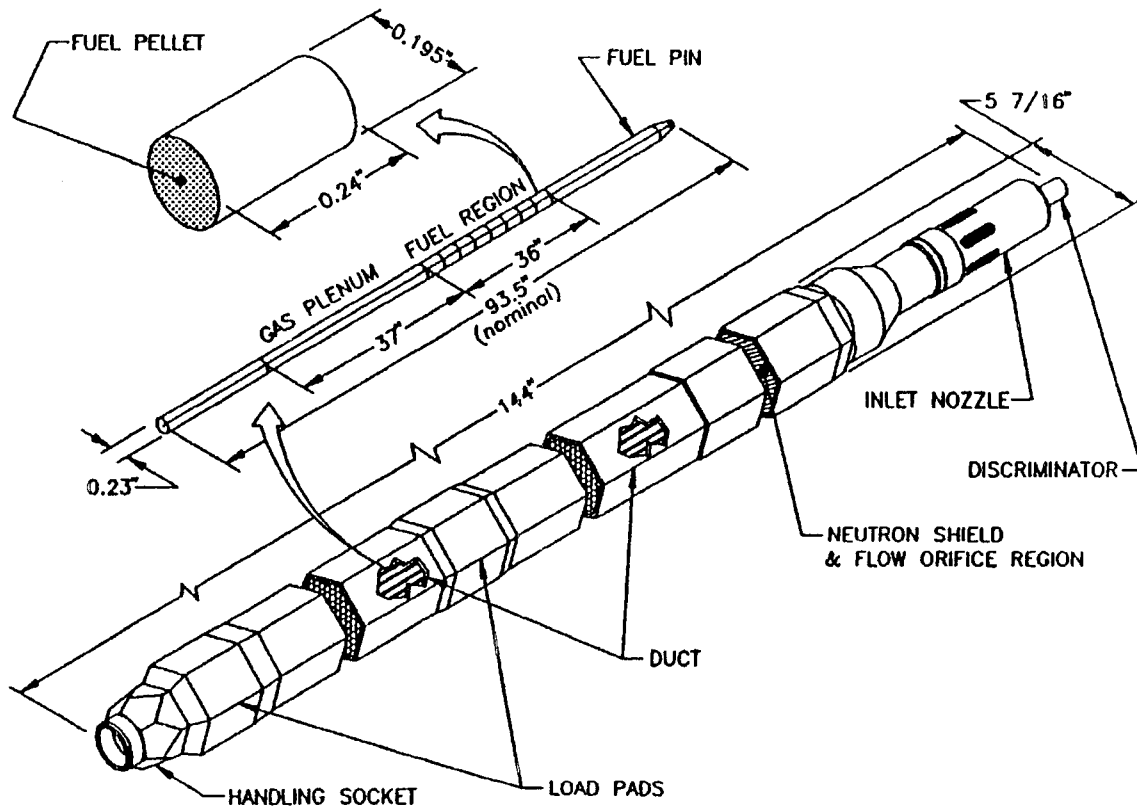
Fast Flux Test Facility standard driver fuel assembly.
